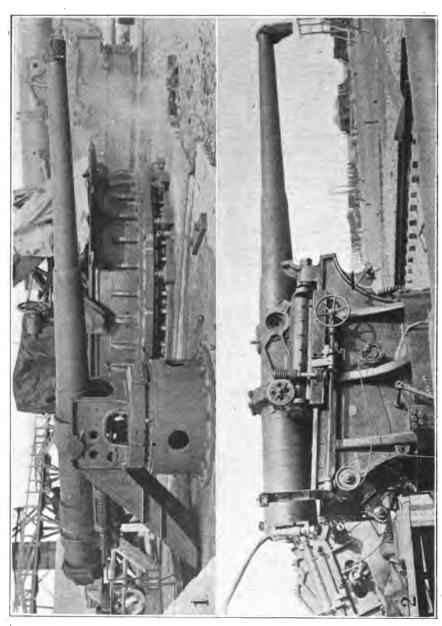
Types of 5-inch and 6-inch seacoast guns removed from fortifications to be mounted on improvised wheeled carriages.
